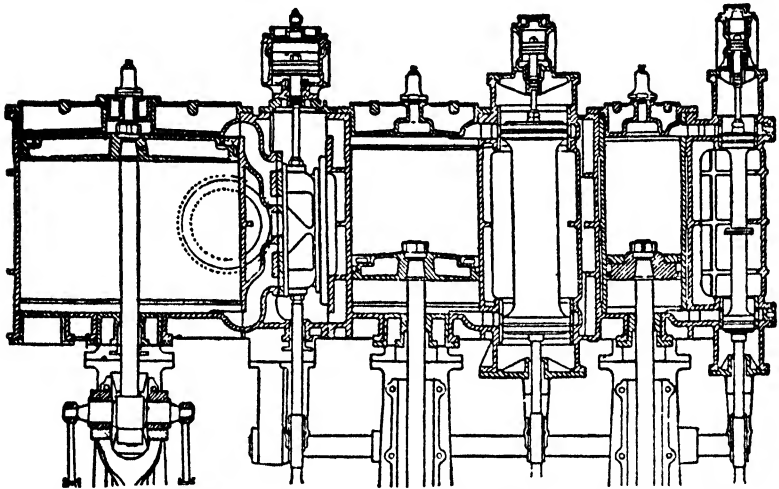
Triple-expansion engine built for the Emergency Fleet Corporation, 2,800 hp.
